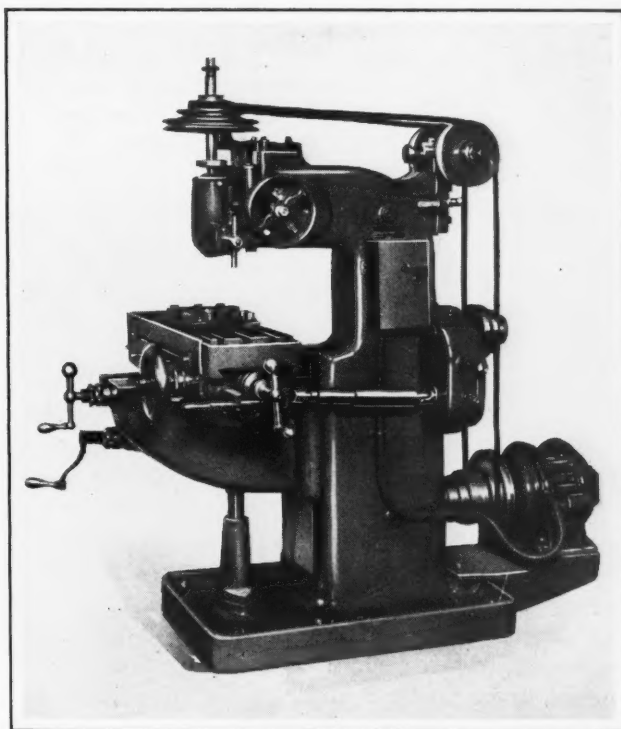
Reed-Prentice Die-sinking and Vertical Milling Machine
